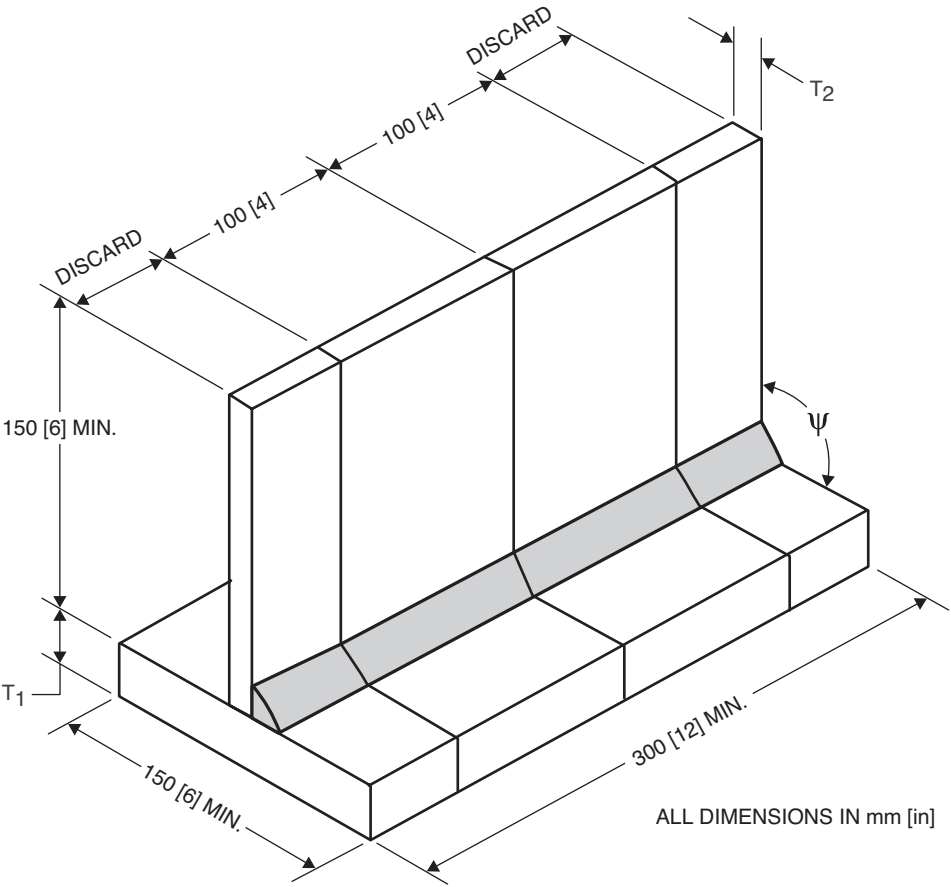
Fillet Weld Break Specimen Location
